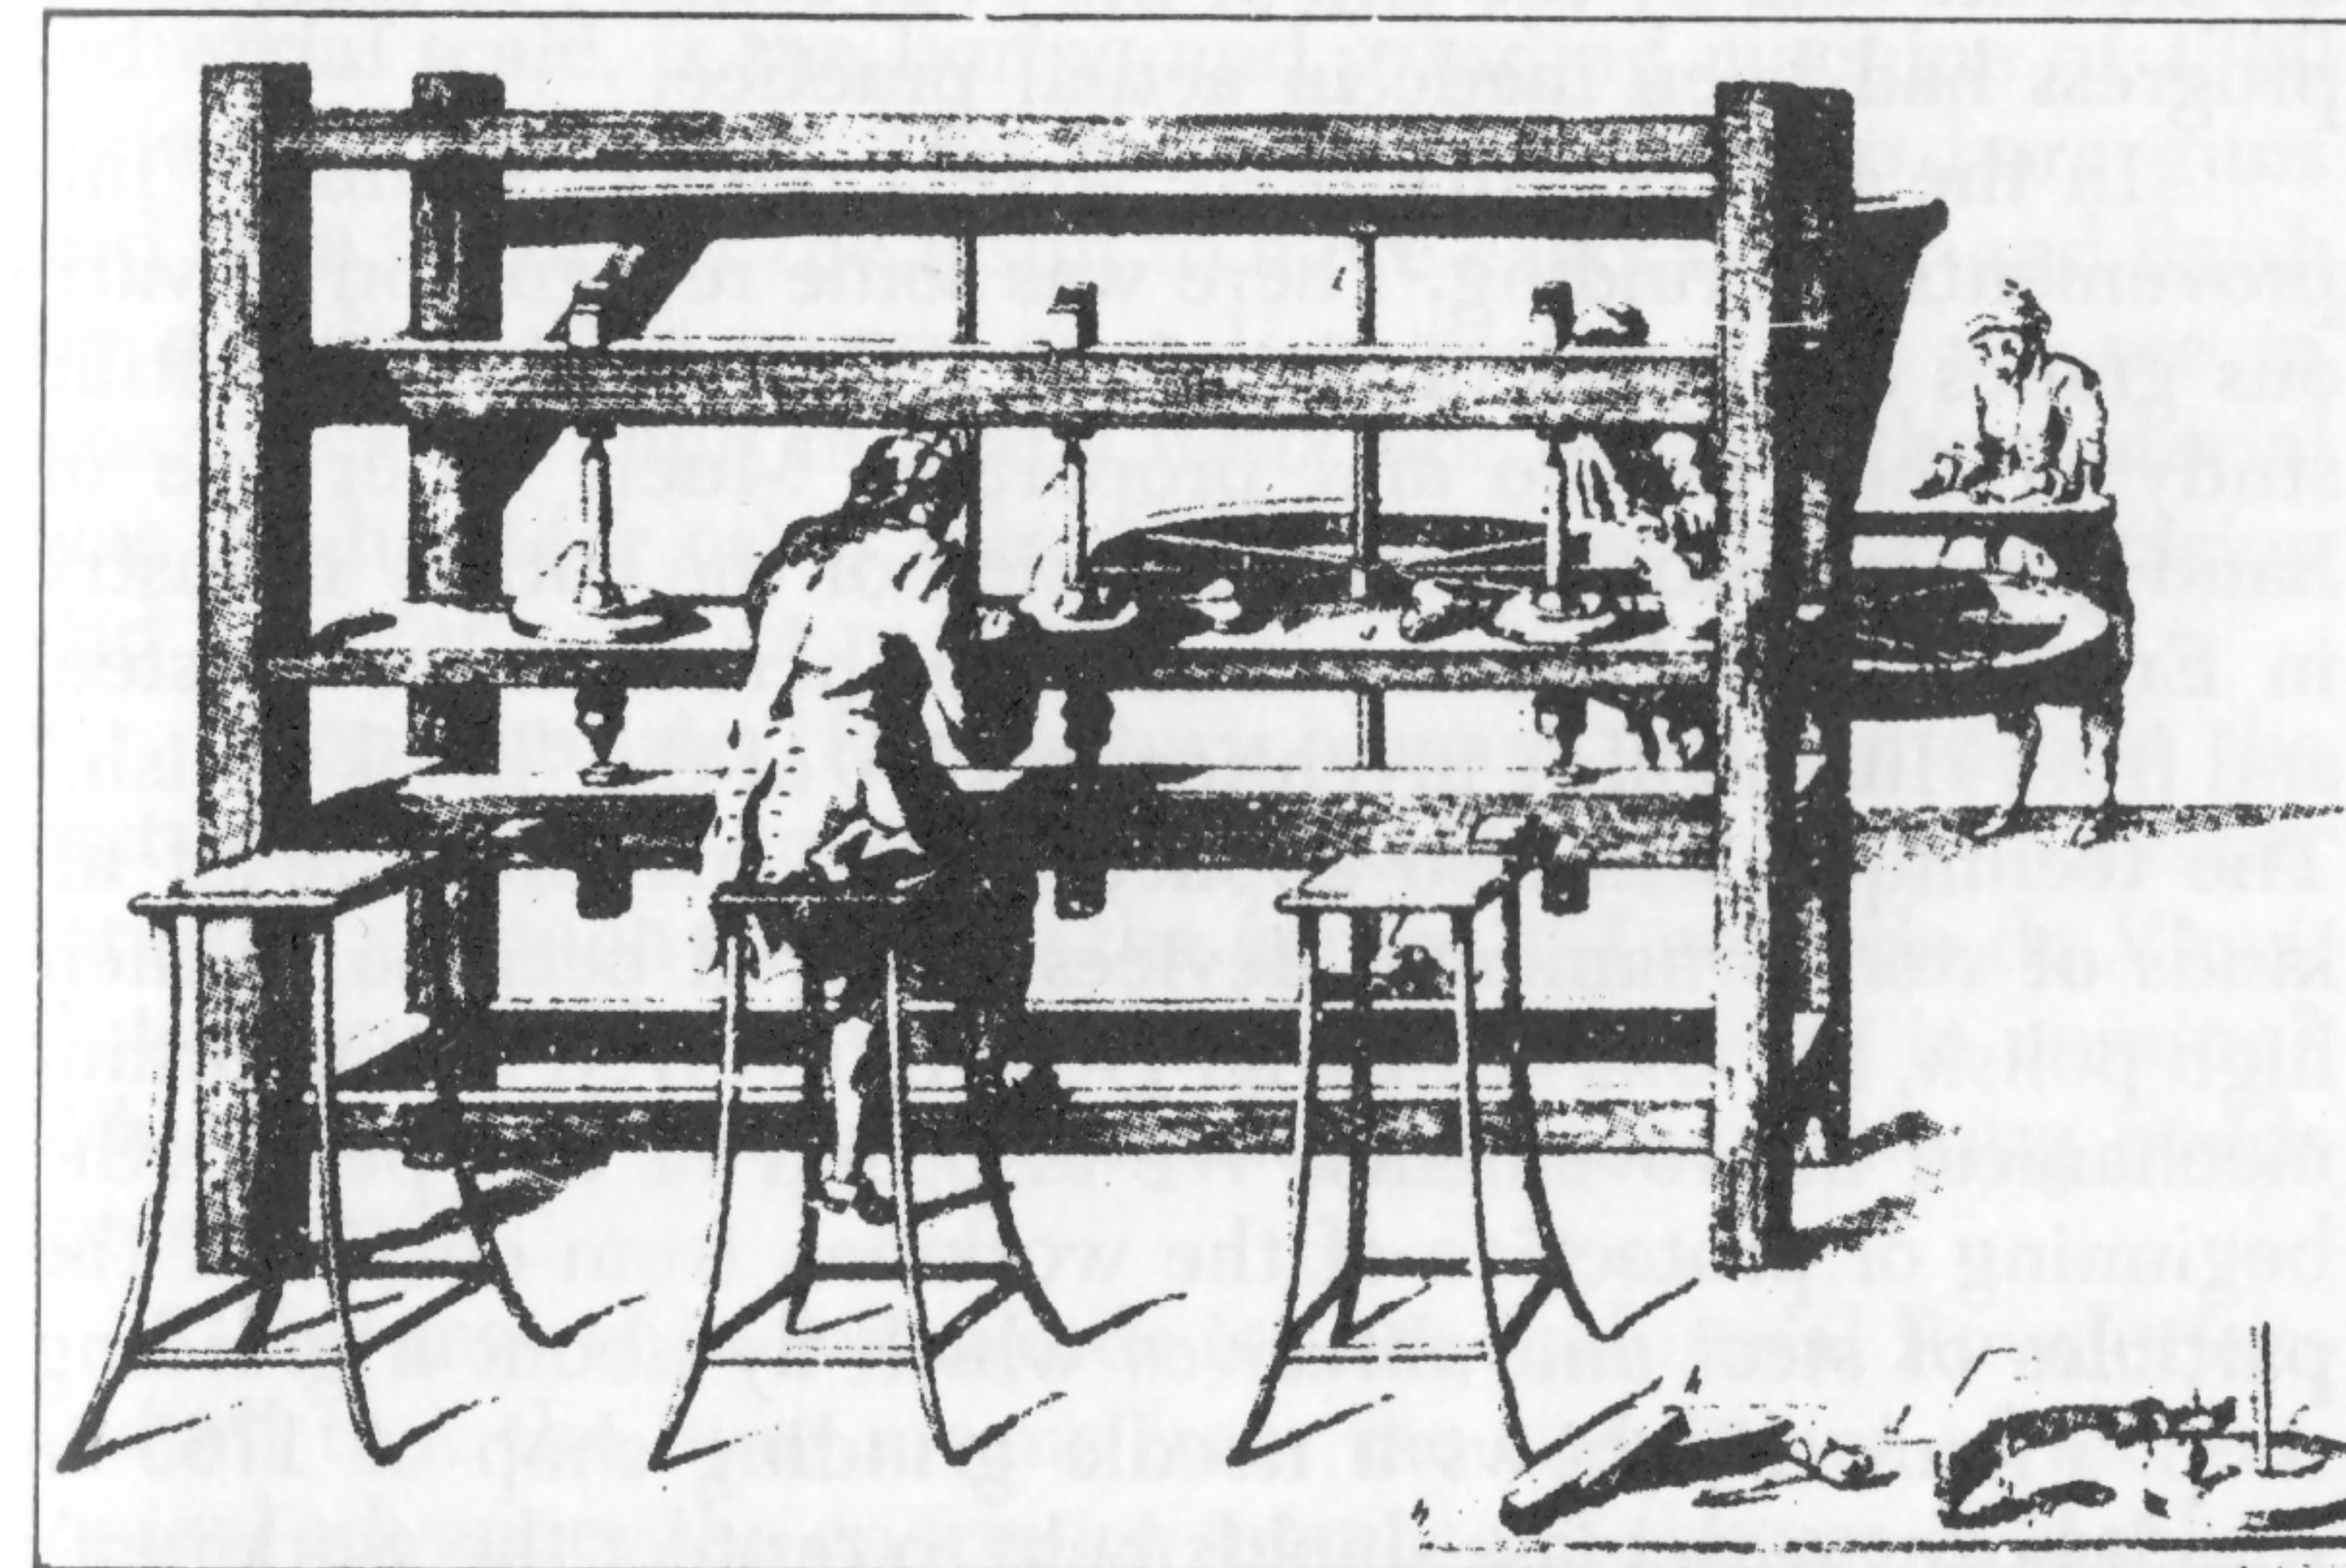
GRINDING MACHINE FOR GEMS, 1752 (Schroeder)
